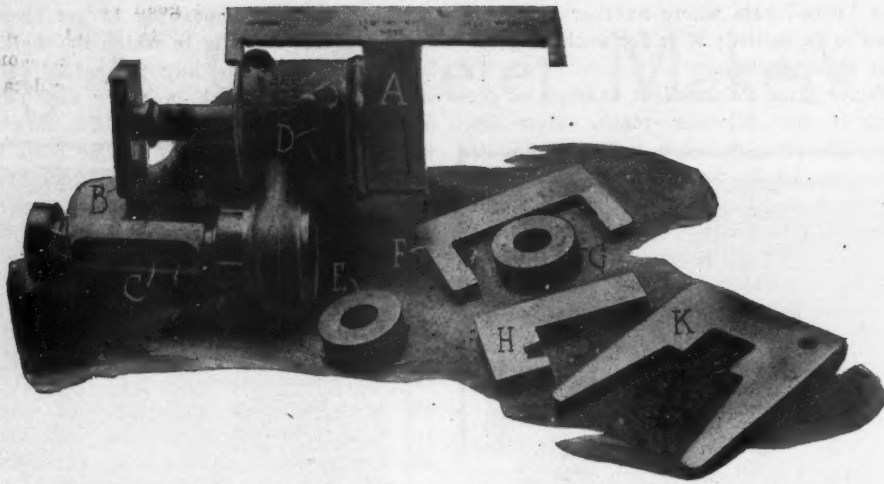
GAUGES AND OTHER PARTS NEEDED IN INSPECTION DEPARTMENT
